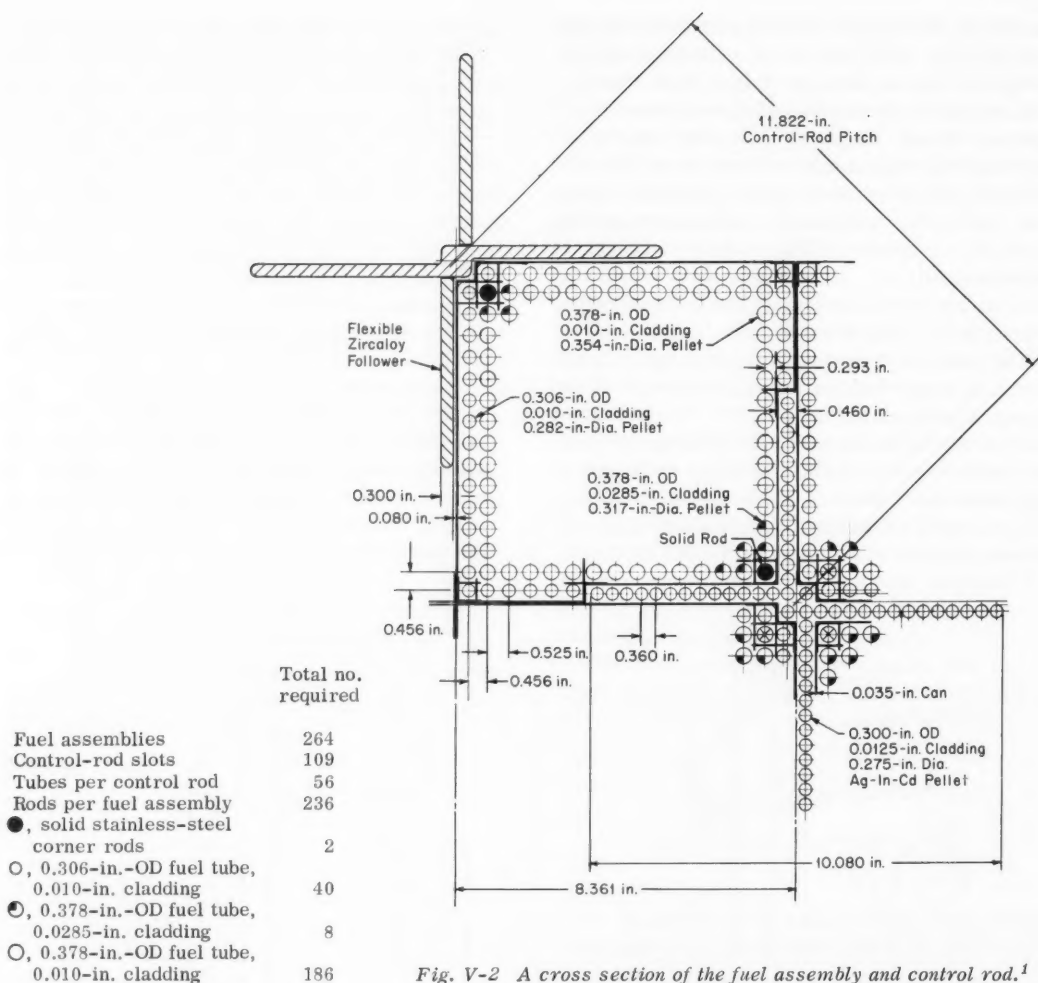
A cross section of the fuel assembly and control rod.<sup>1</sup>
